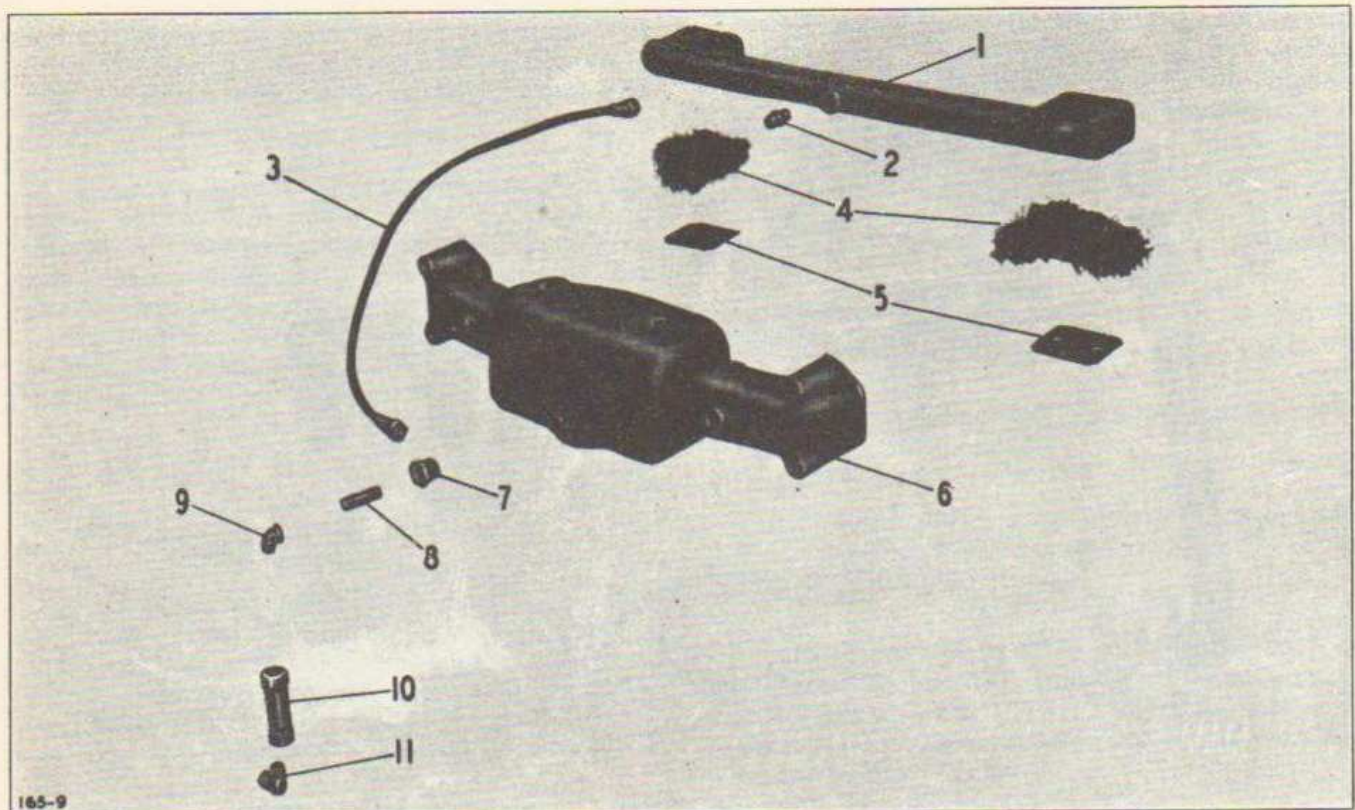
Exploded View of Inlet Manifold and Breather Arrangement
